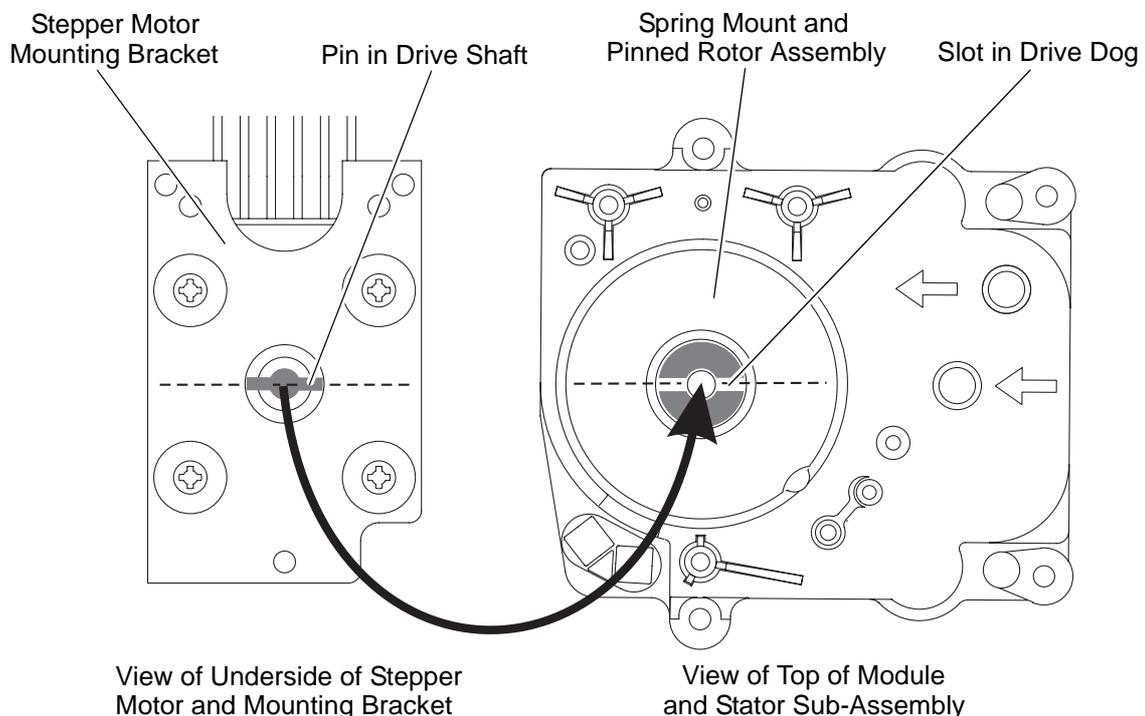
Aligning the Stepper Motor Drive Shaft and Pinned Rotor Assembly
